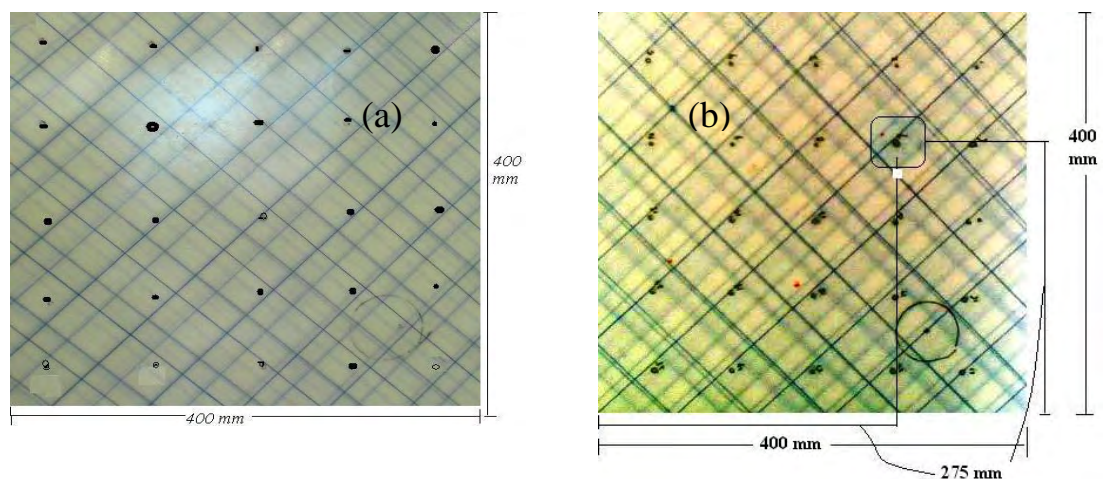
Typical test plates of E-glass fibre, (a) no delamination, (b) delamination at coordinate location (275mm, 275mm)
